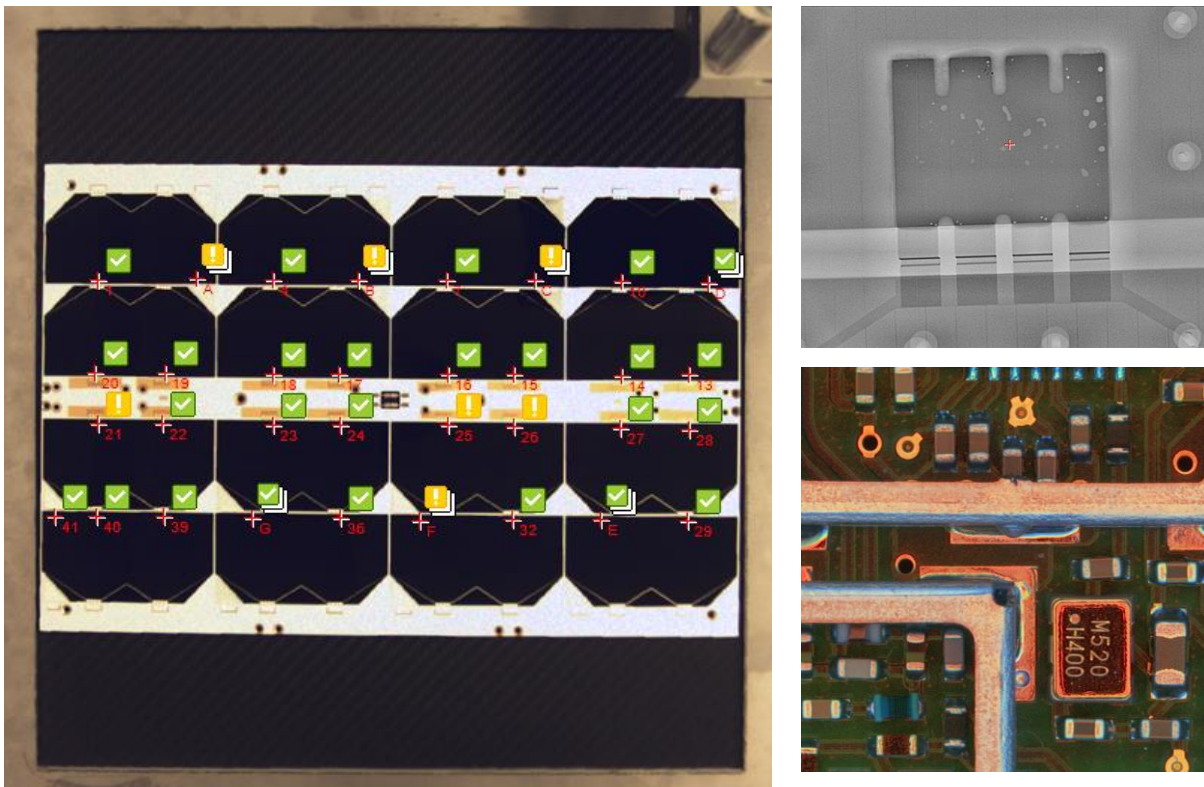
Optical and X-Ray inspection of electronic components and soldering quality
